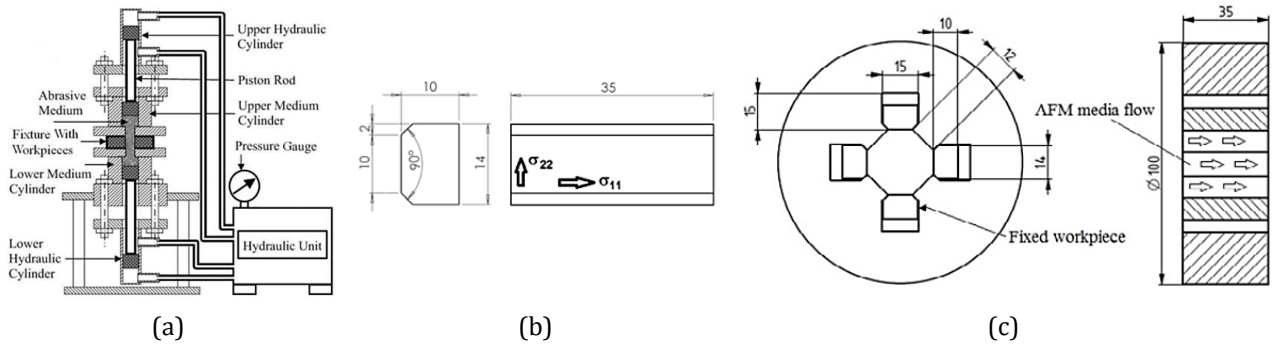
(a) Two-way AFM (b) Workpiece (c) Fixture with workpiece [34].
